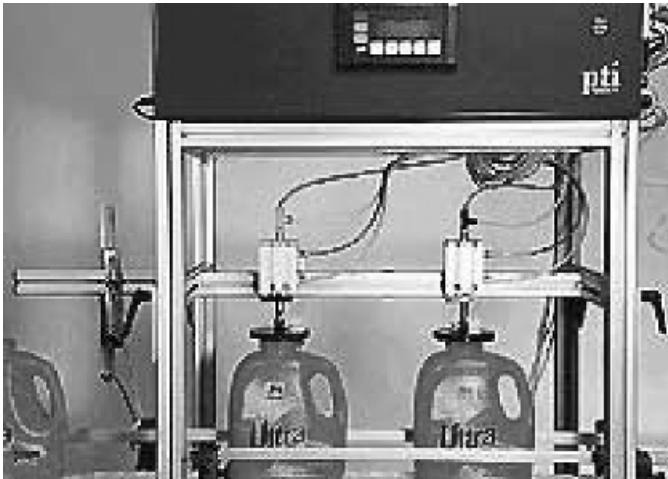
Container inspection systems using pressurized air to detect holes or weak spots in blow-molded containers. (Courtesy of Packaging Technologies and Inspection, Tuckahoe, NY.)
